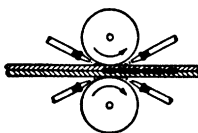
Seam-welding electrodes with water cooling.
